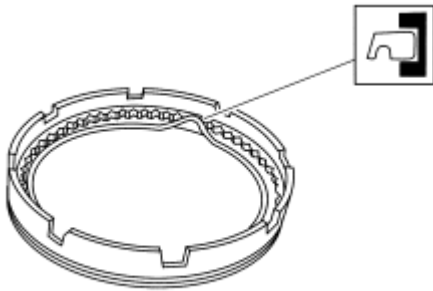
Low/Reverse Clutch Piston Outer Seal
